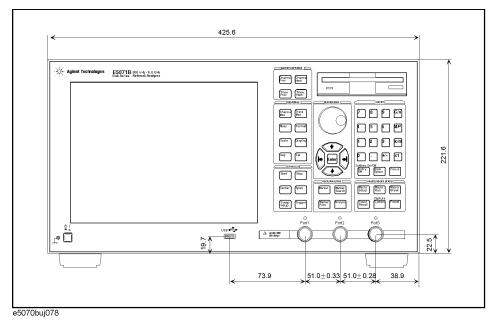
Dimensions (front view, E5071B with Option 213, in millimeters, nominal)
